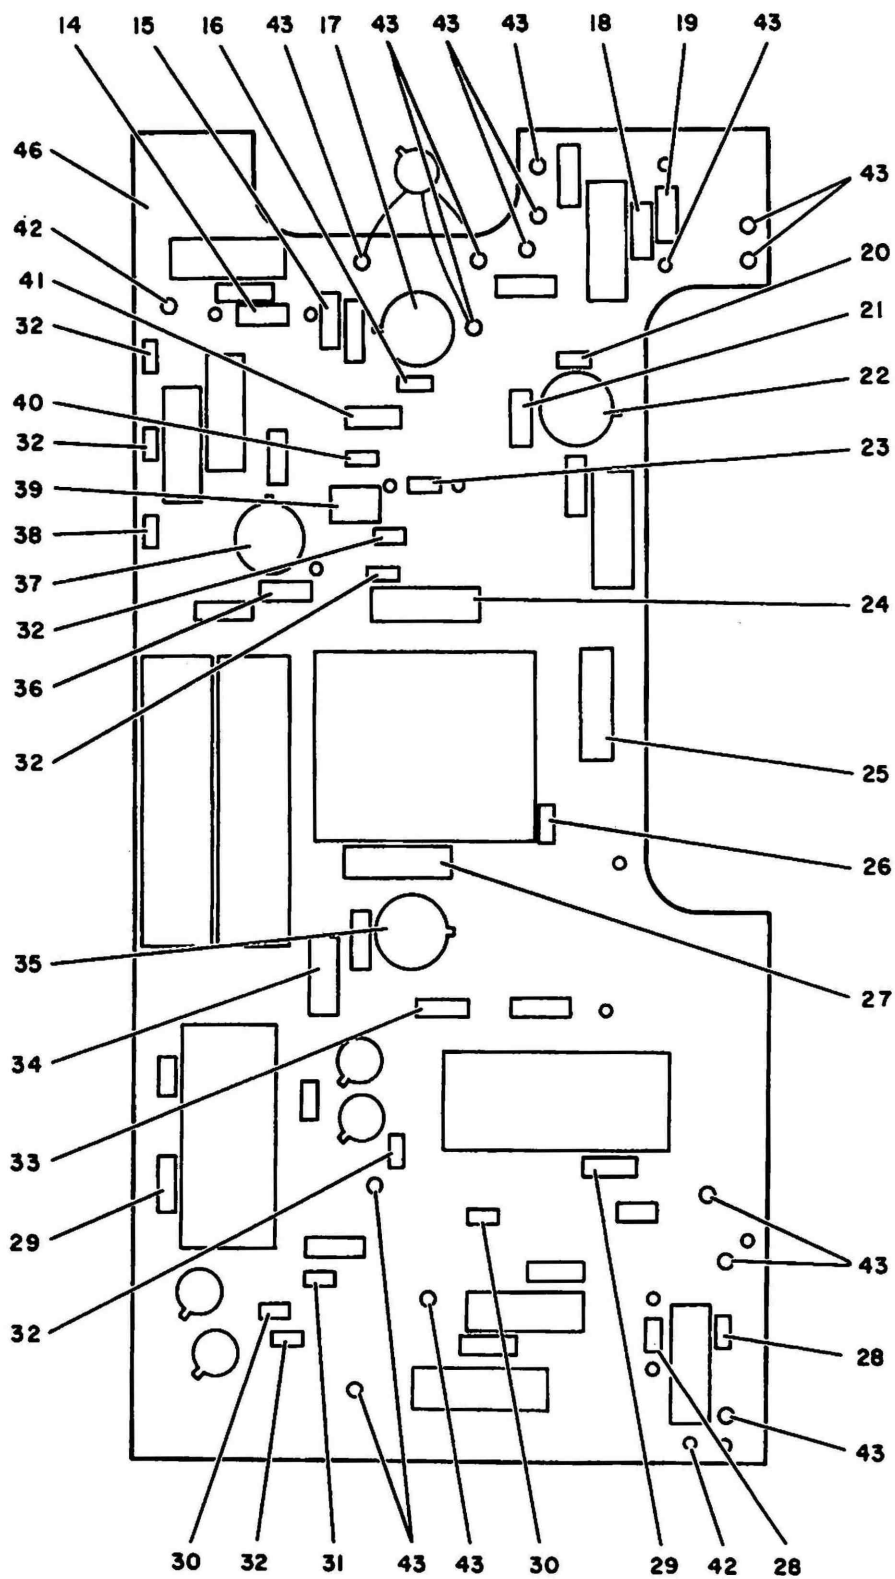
Single Side Band and Mixer Board Assembly (Sheet 2 of 2)
